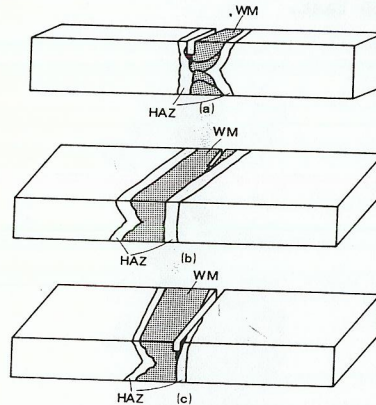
Fatigue CTOD test specimens for detection of the minimum fracture toughness on welded joints
